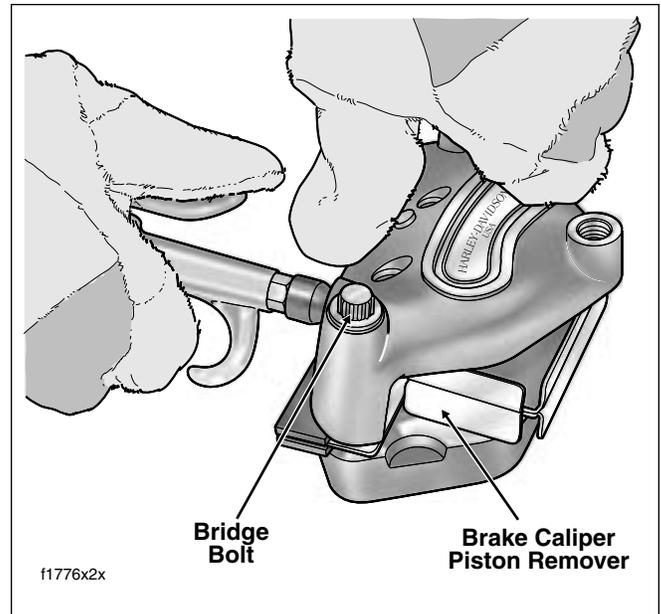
Direct Compressed Air Into Banjo Bolt Hole
